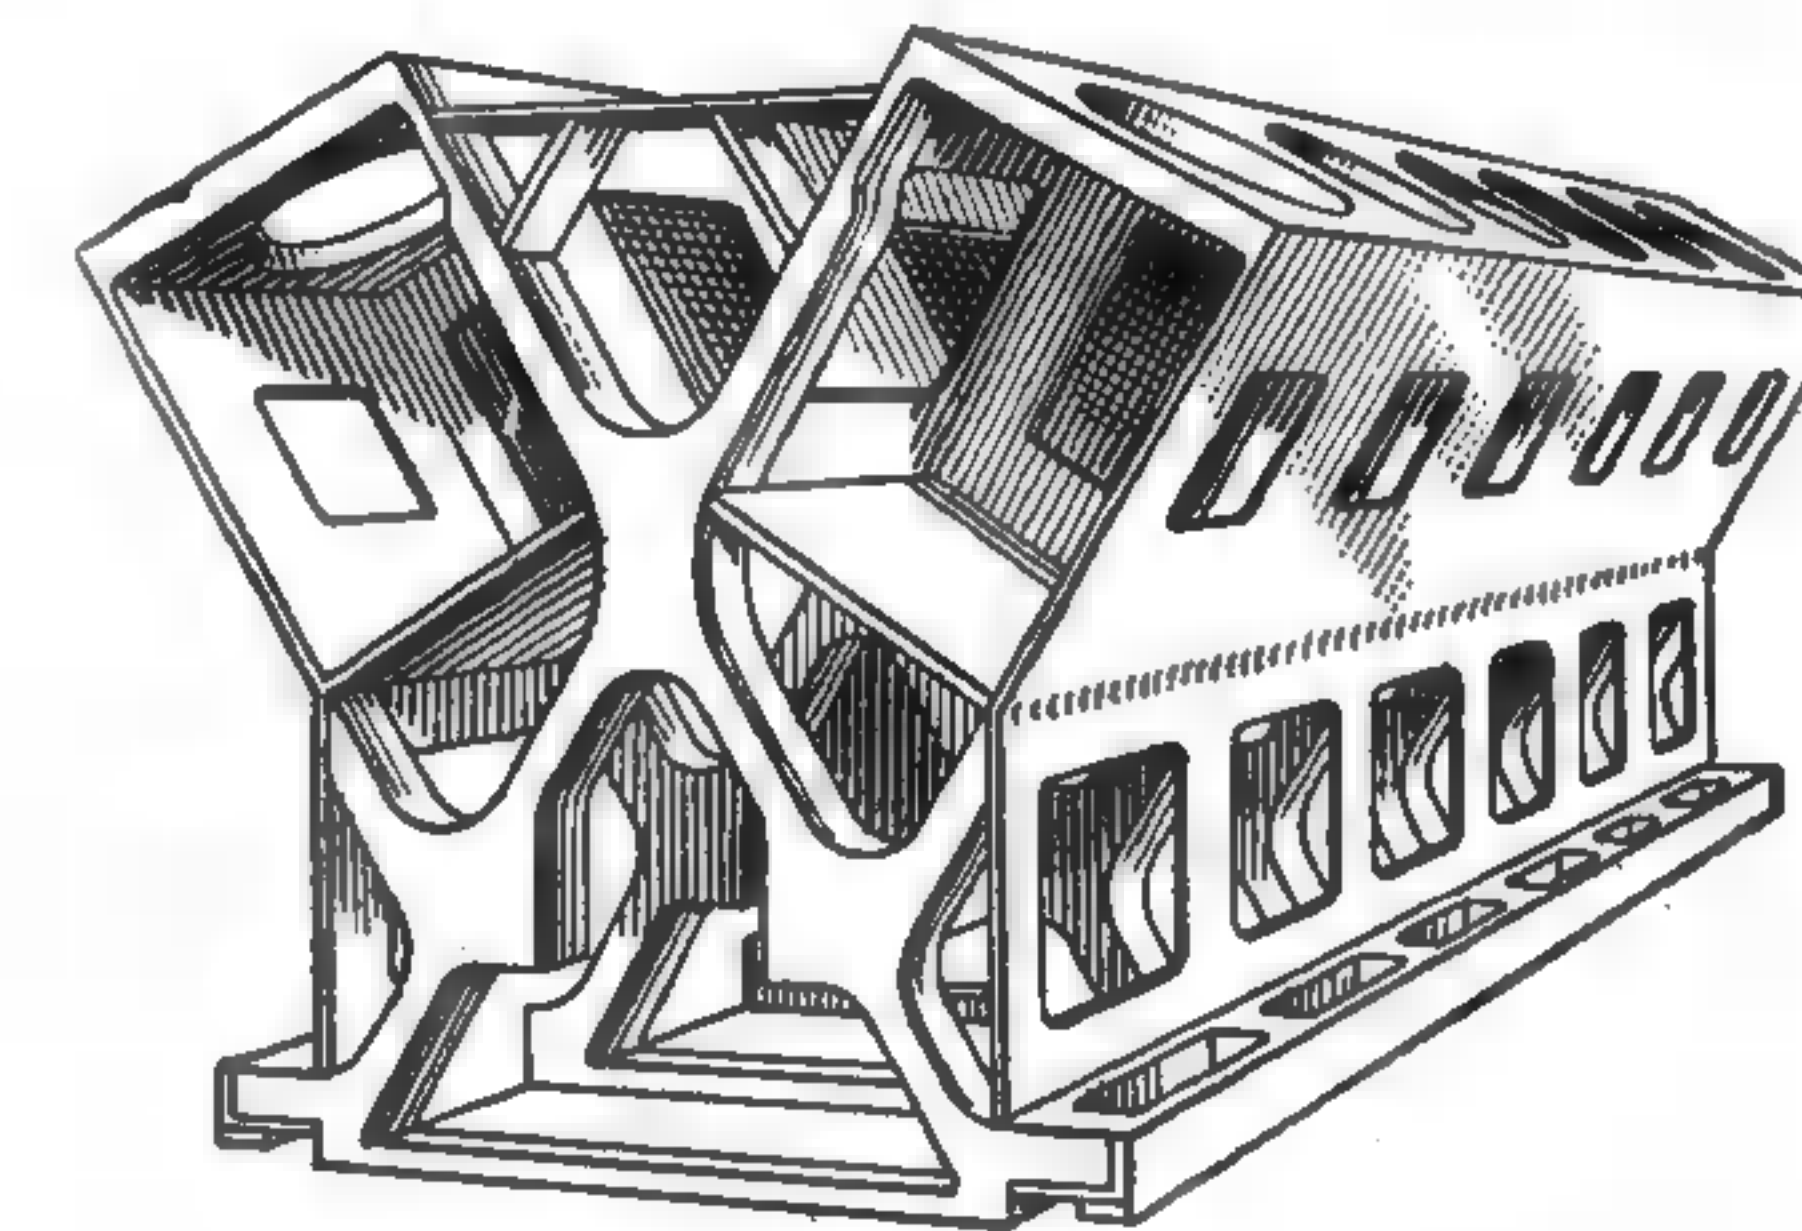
Crankcase in process of fabrication by welding.
